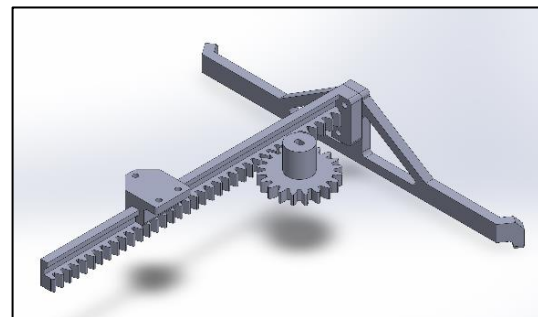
Pusher mechanism mounted underneath *Boulder*.
